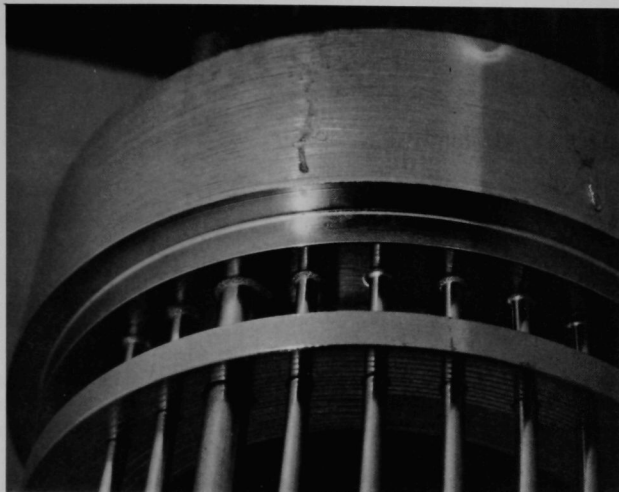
Closeup of Brazed Thermocouples on Bottom, or Sodium, Side of Bulkhead for Test-3 Instrumented Subassembly (2X scale)
